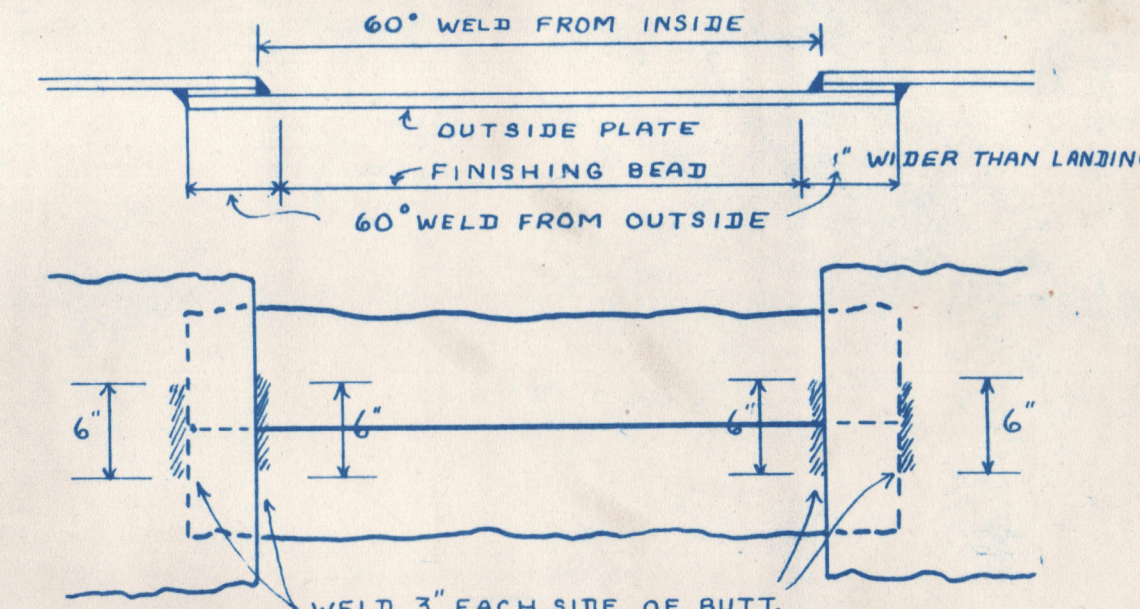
PLATES TO BE VEEED OUT TO A 60° INCLUDED ANGLE FOR ALL BUTT WELDS AND BEVELLED TO WITHIN 1/8" FROM BOTTOM PLATE. GAP OF 1/8" TO BE KEPT BETWEEN EDGES TO BE WELDED
